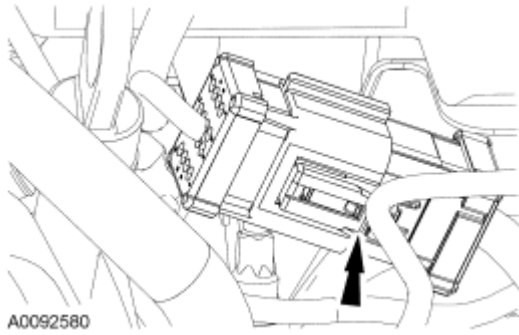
Locating Fuel Charging Wiring Harness Electrical Connector
